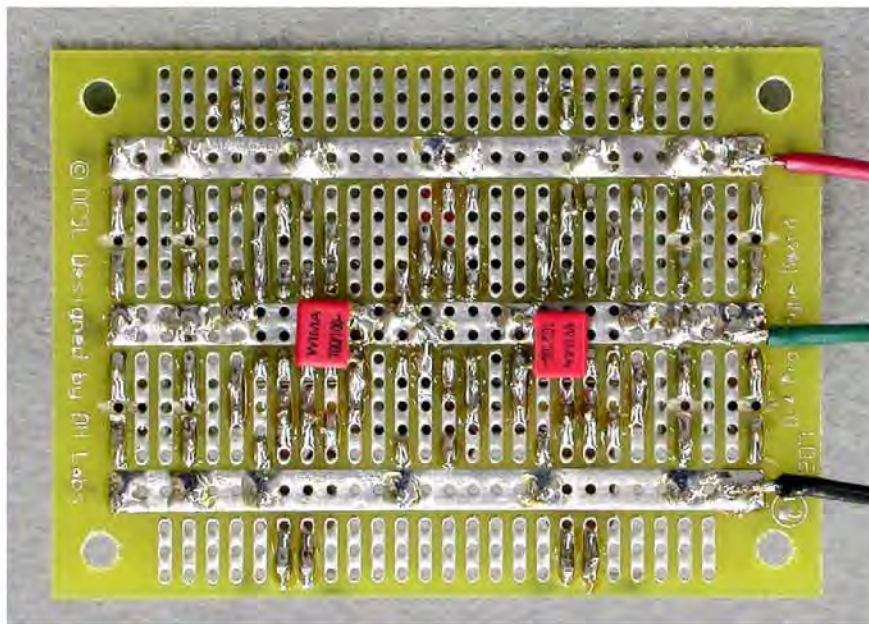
Bottom view of the THAT 1200 balanced line receiver board. The 100pF capacitors in the RFI filter, C3, are mounted on the bottom of the board.
